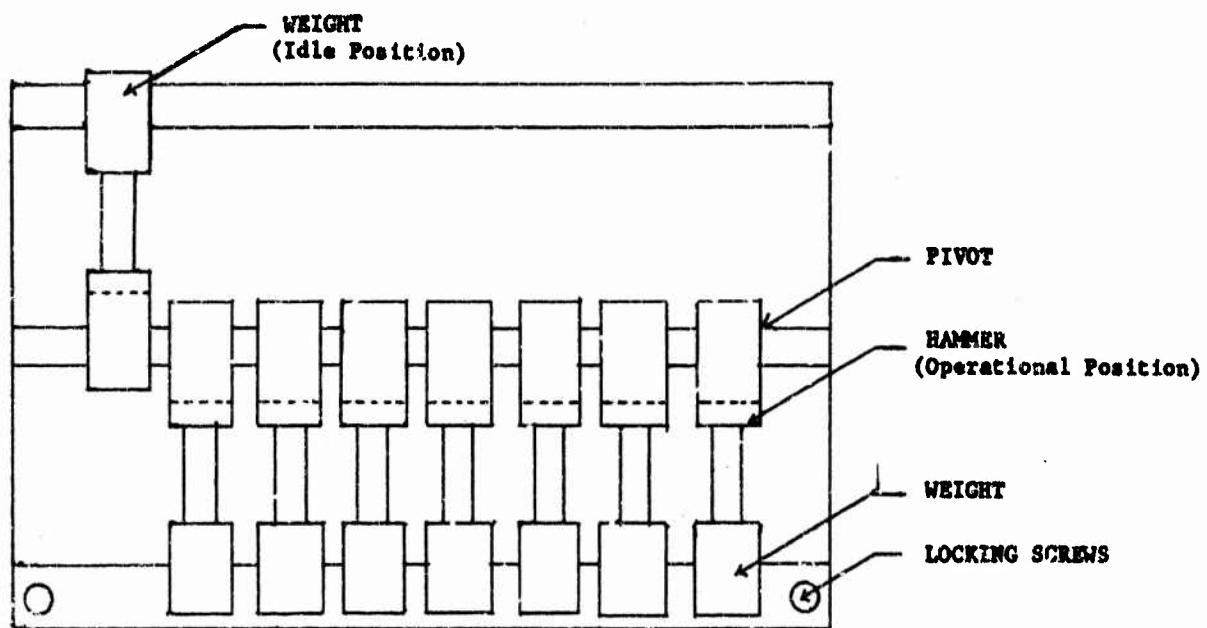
A - TOP VIEW - HAMMERS AND WEIGHTS
